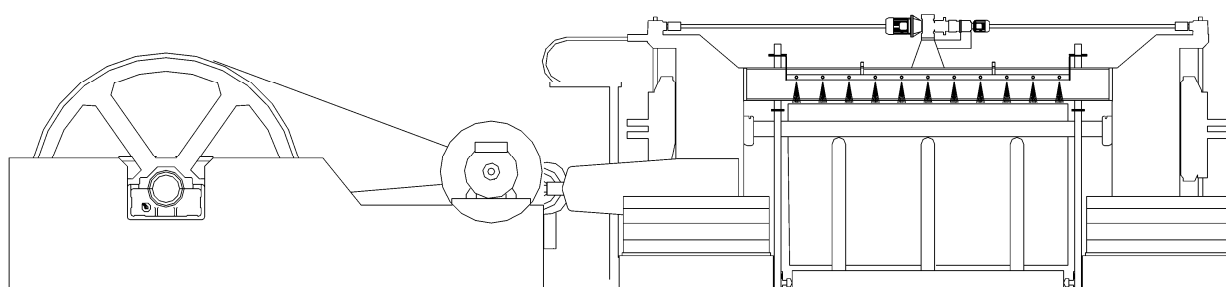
Marble gang saw with open structure and mobile blade carriage
